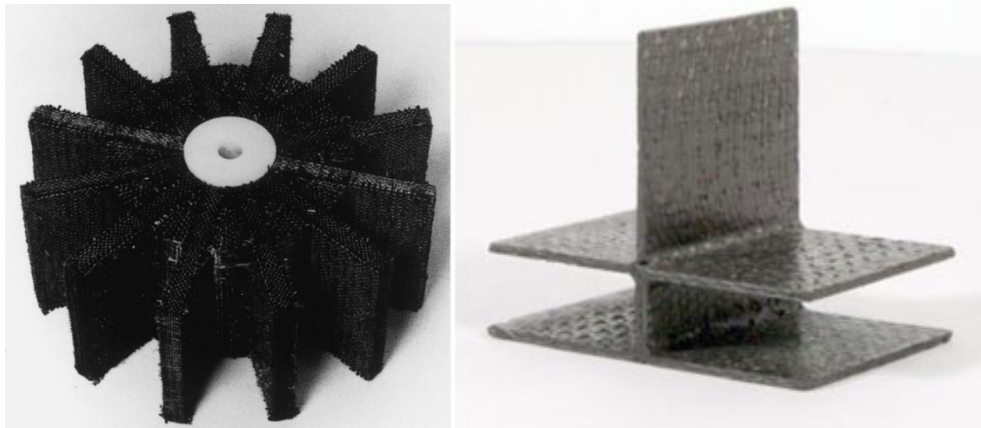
Turbine rotors produced by Techniweave, Inc. and Double T-Joint produced by Bally Ribbon Mills.
